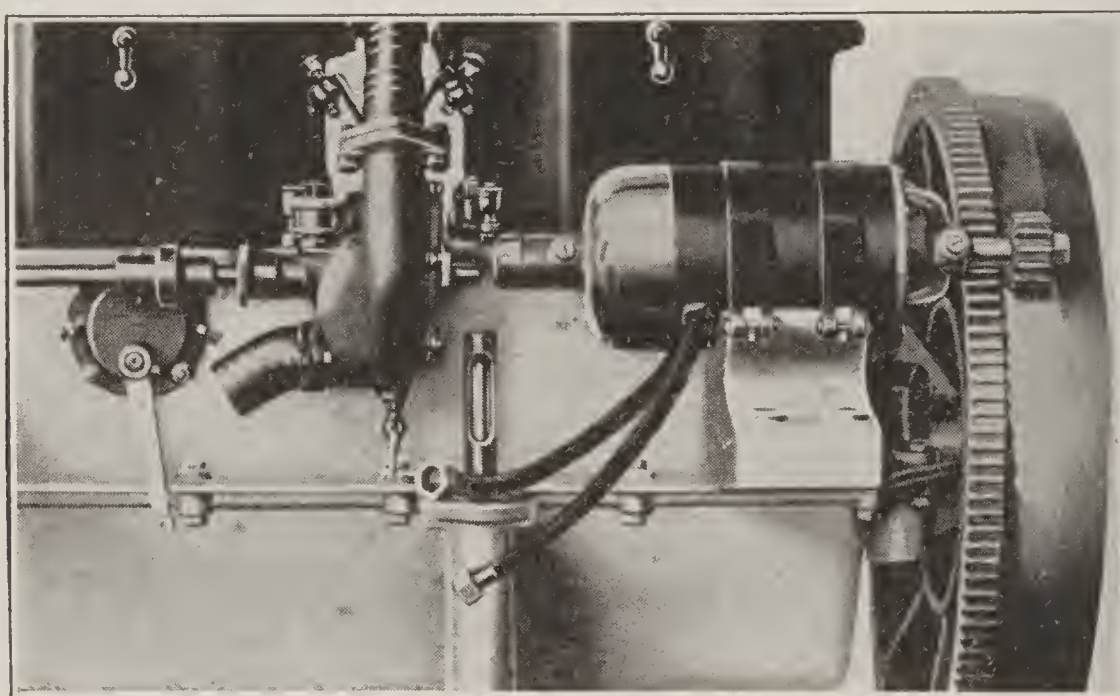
Mounting of Bosch-Rushmore Starting Engine
